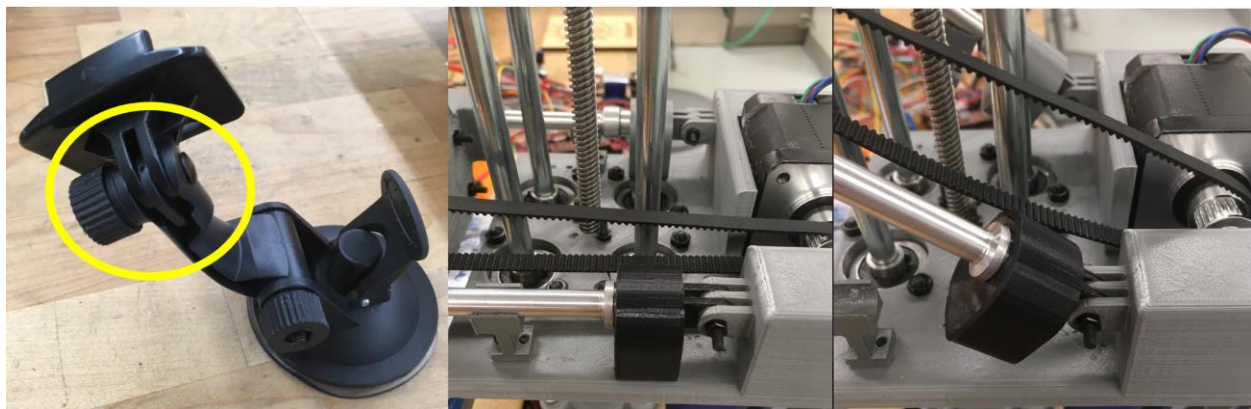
GoPro Mount (Left) and Implementation of Mechanism to 3D Printer (Middle & Right)
